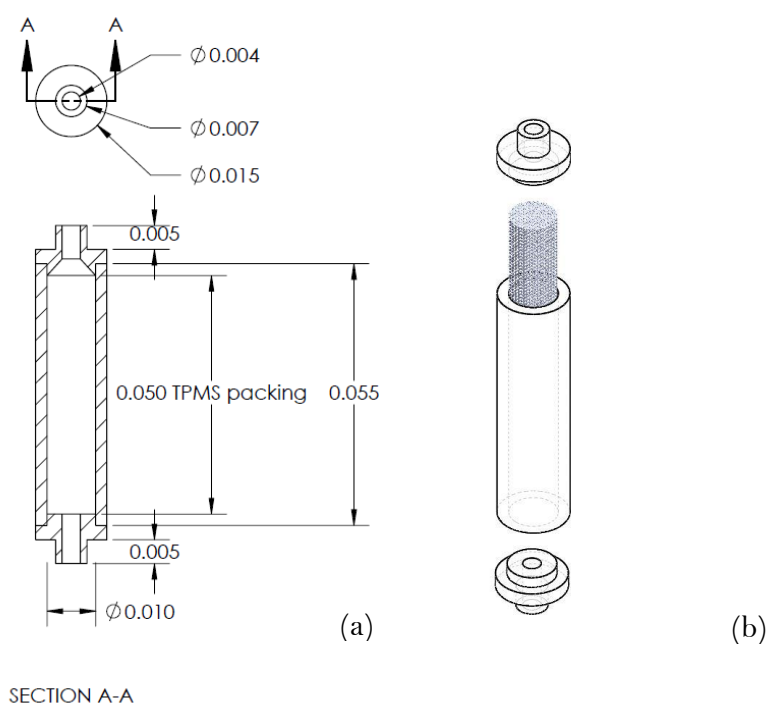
(a) Orthographic section view of column casing apparatus used in column templating (dimensions in mm); (b) exploded isometric view of TPMS column in casing
